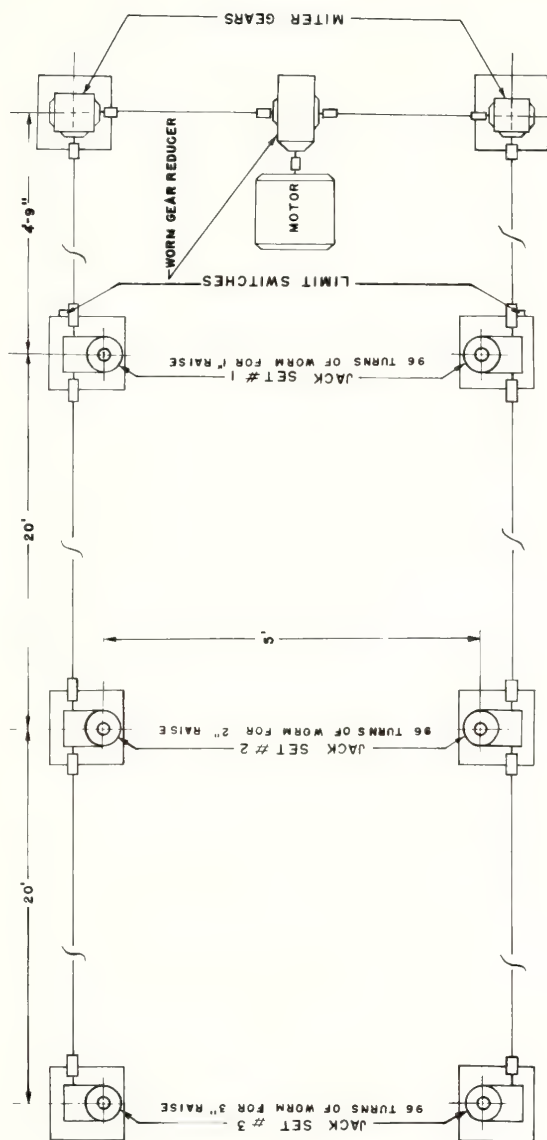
PLAN VIEW OF JACKS AND GEARS
